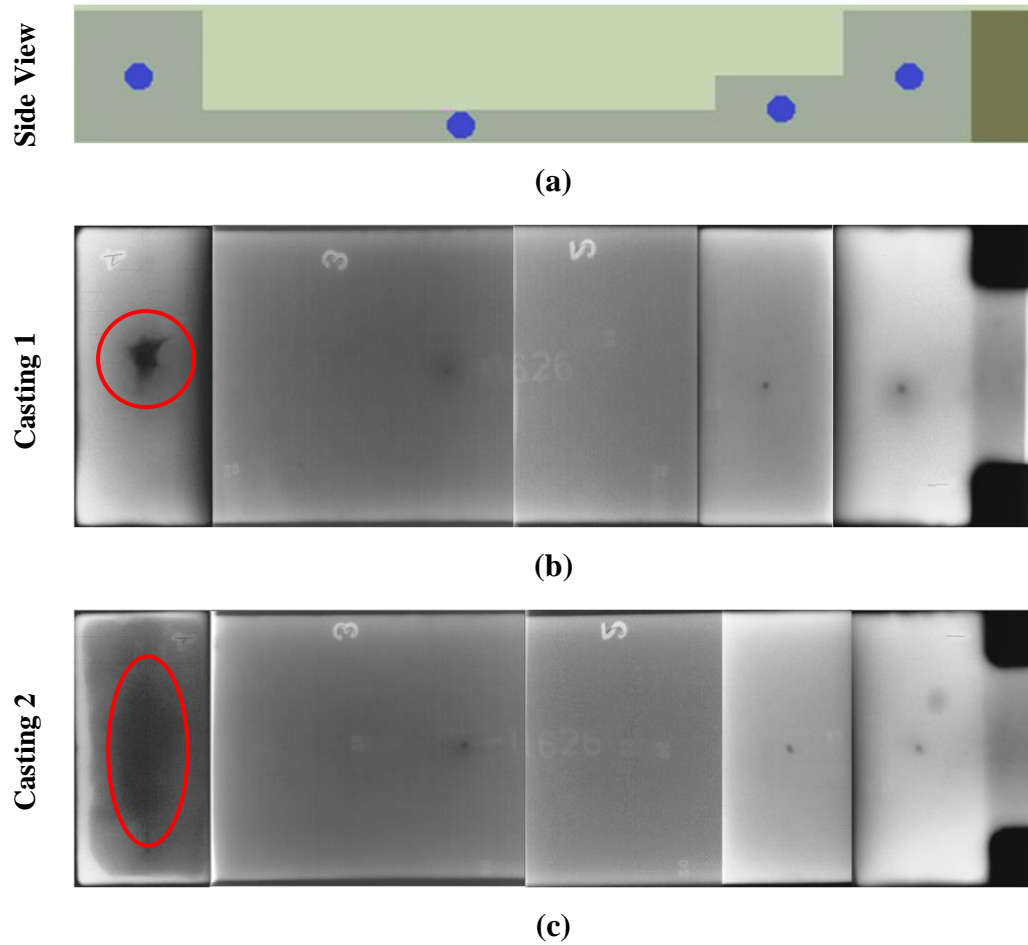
Experiment 2: (a) schematic showing the location of thermocouples in casting, (b) Radiographic image of casting 1, (c) radiographic image of casting 2
